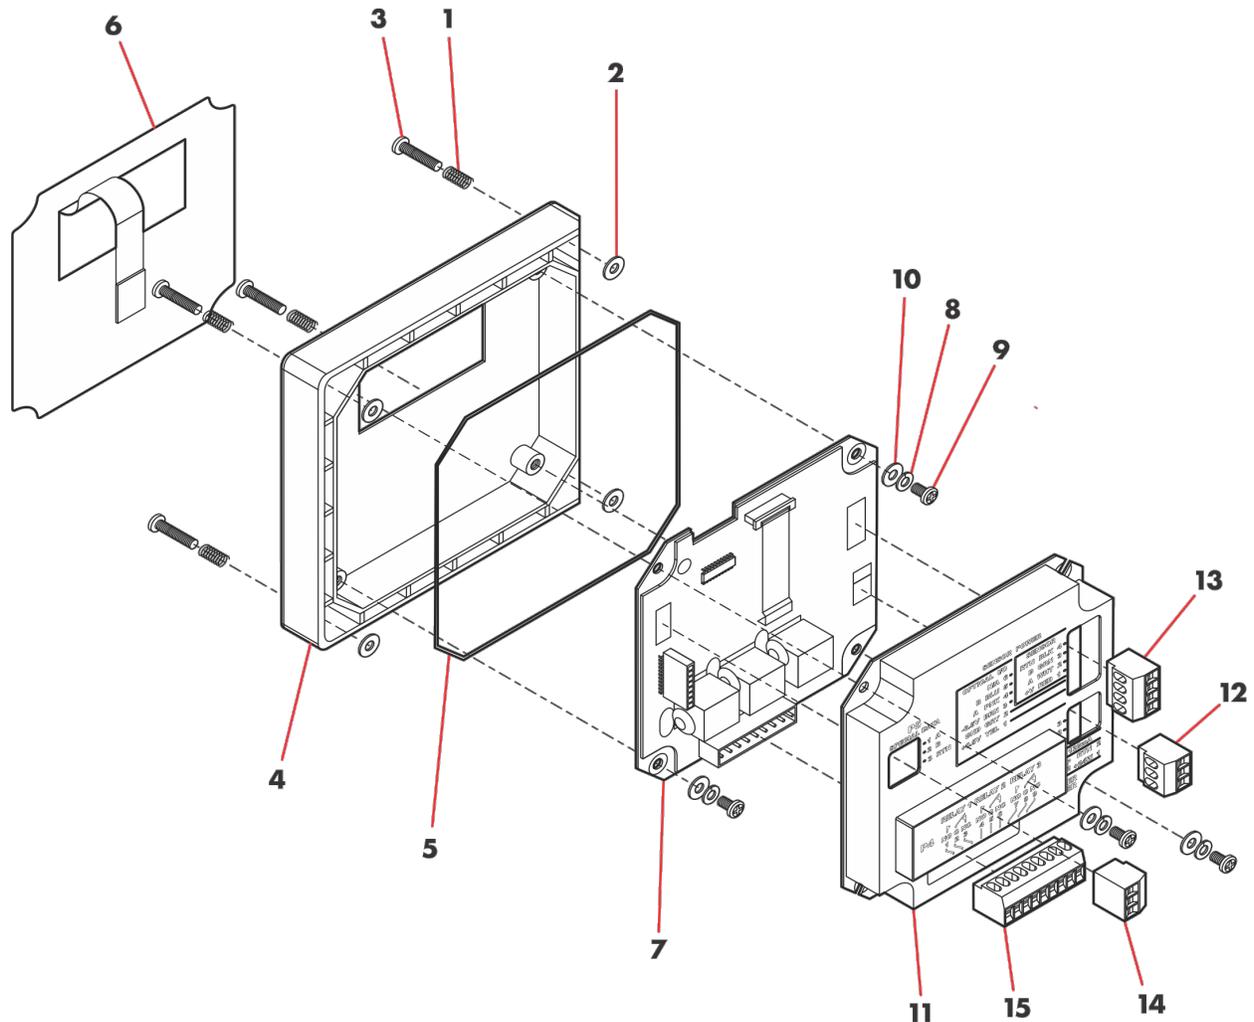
Exploded Diagram of Front Panel Control Board with Relays
